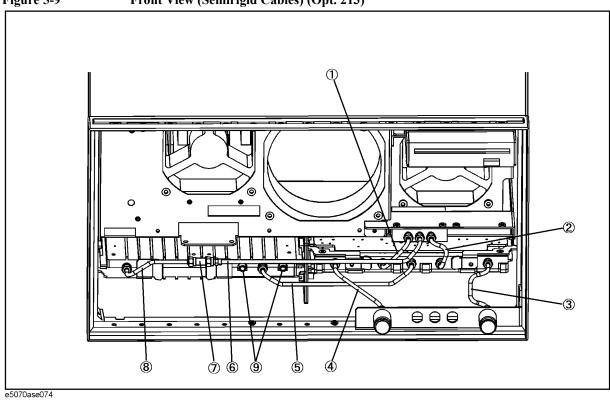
Front View (Semirigid Cables) (Opt. 213)
